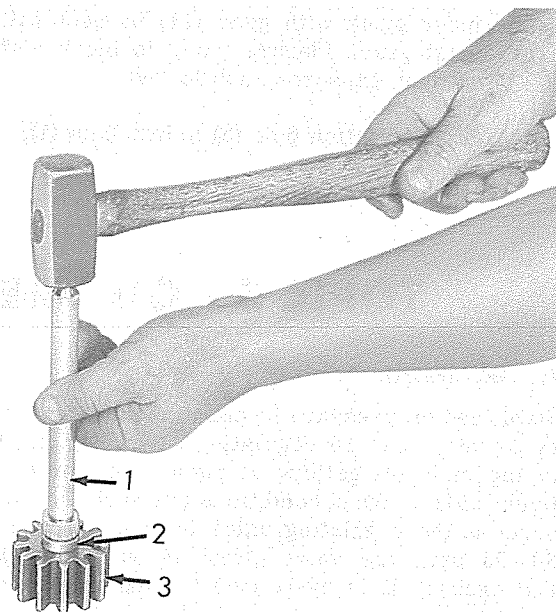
Installing Bushing in Oil Scavenging Pump Driven Gear (T-20236)
